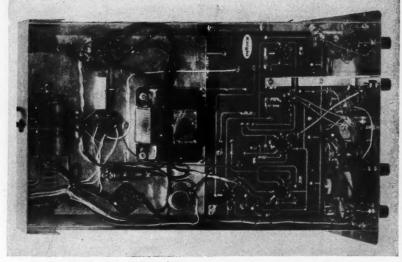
Bottom view of the oscilloscope with all parts in place. The use of printed-wiring boards guarantees uniform lead dress and eliminates guesswork.
